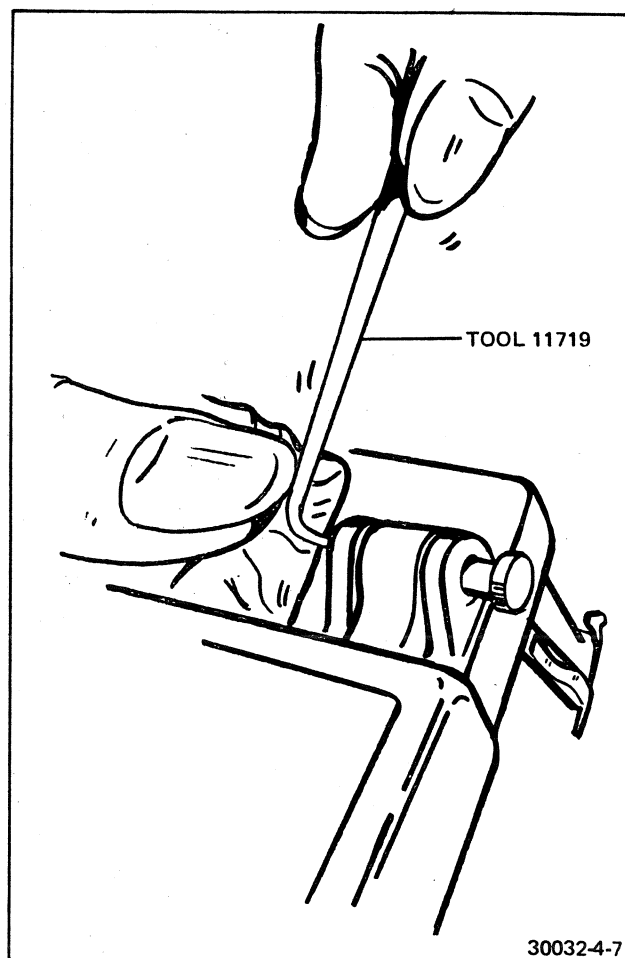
REMOVING MIRROR COVER/INNER FRAME HINGE PINS
